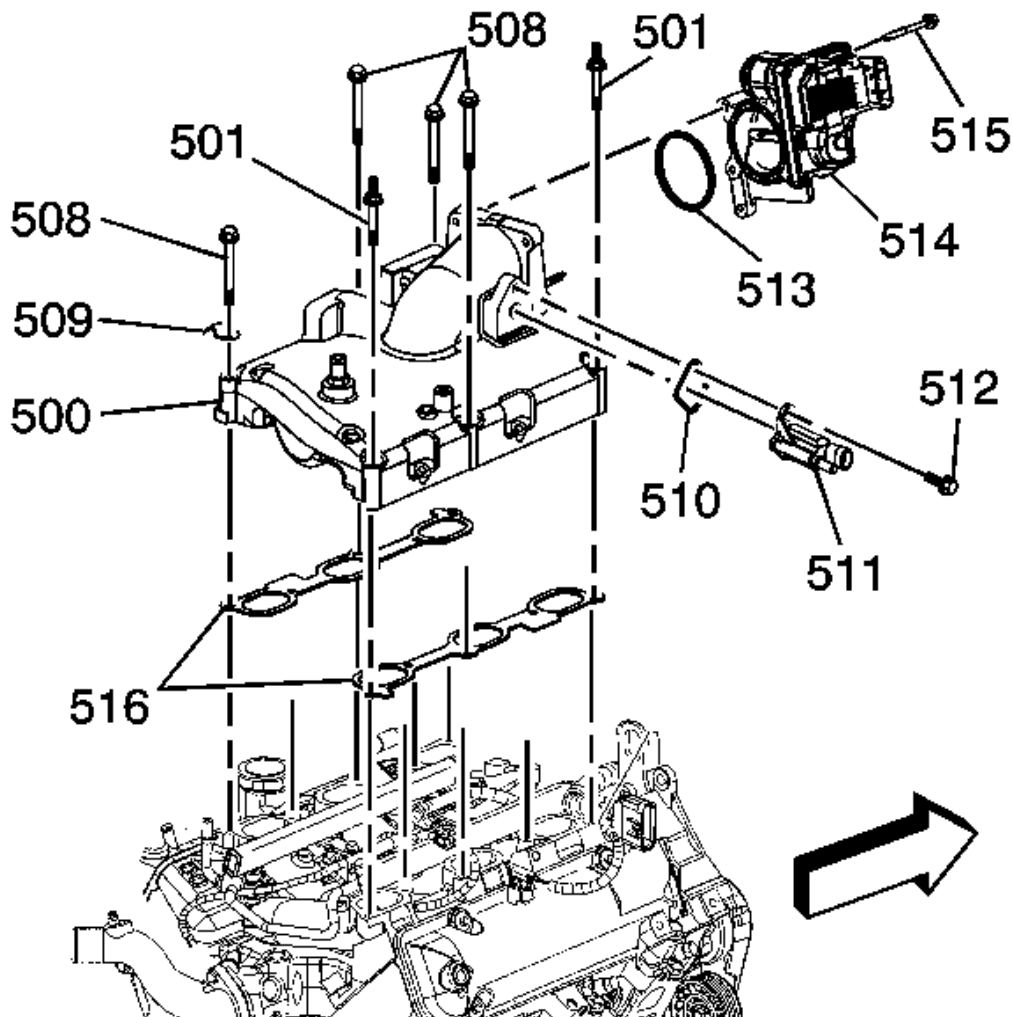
View Of Throttle Body, Intake Manifold & Components
